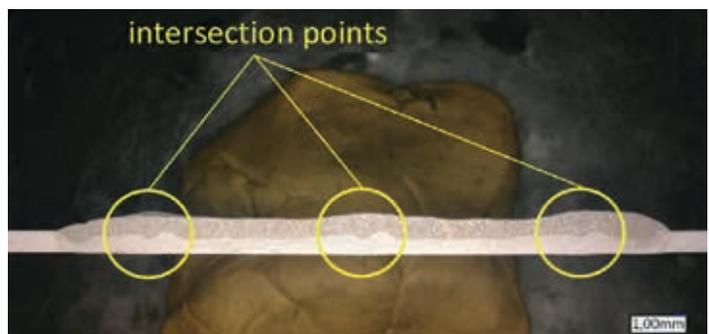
Welding results at the grid intersection points for the additive manufacturing of a grid onto a car body area of 0.7 mm thickness.
